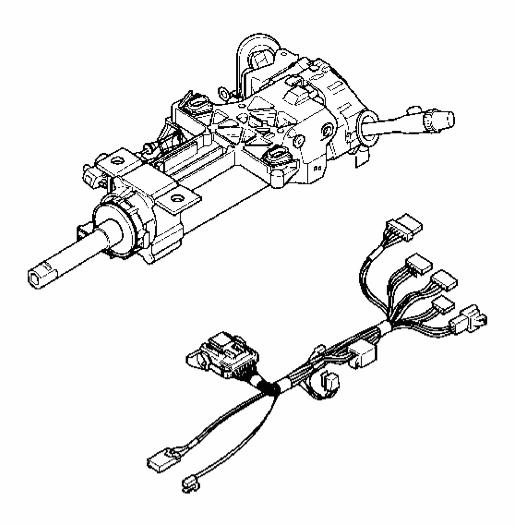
View Of Steering Column And Wire Harness Assembly Courtesy of GENERAL MOTORS CORP.
